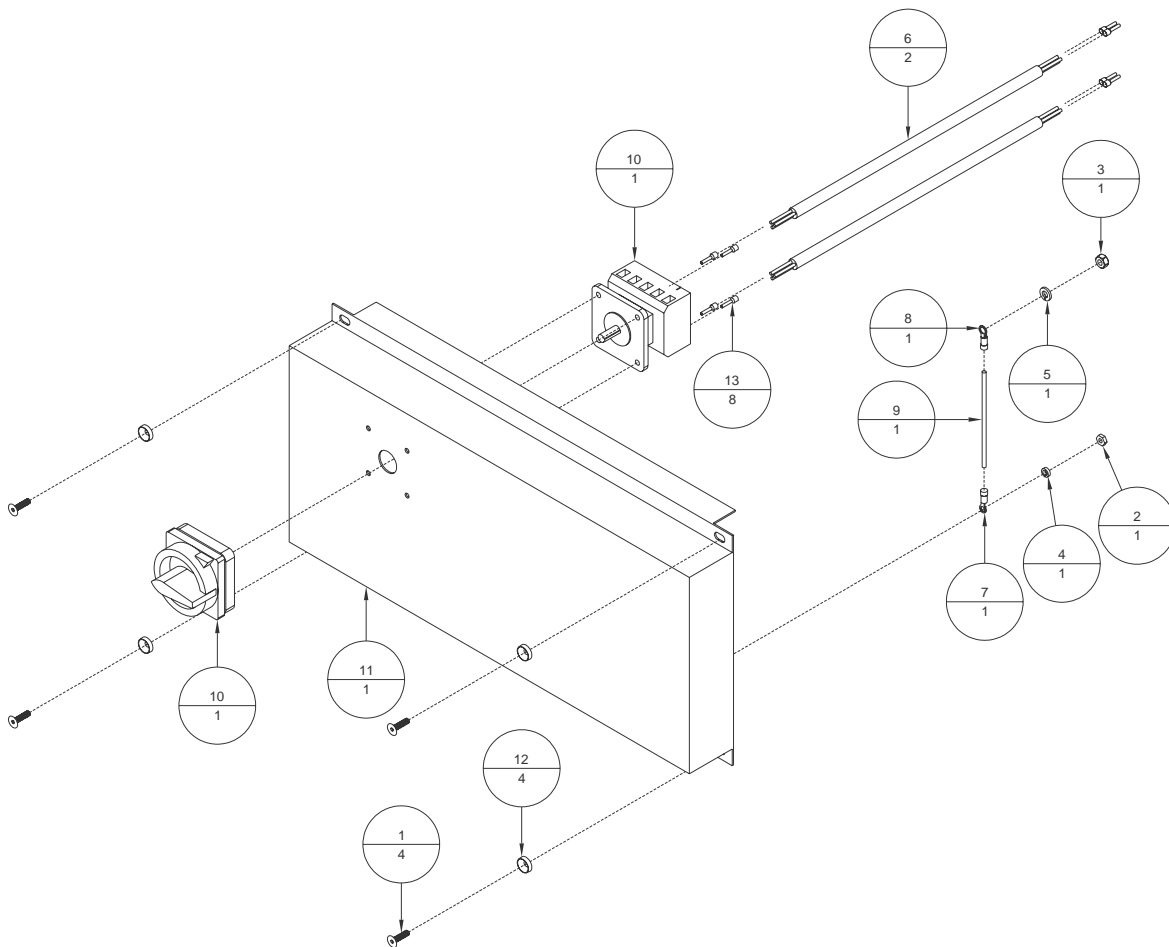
Front Guard Assembly, BK1700 (9103211A)
